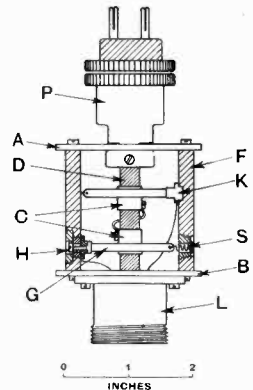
I.F. slip-ring unit omitting brass supporting pillars and outer shield.
